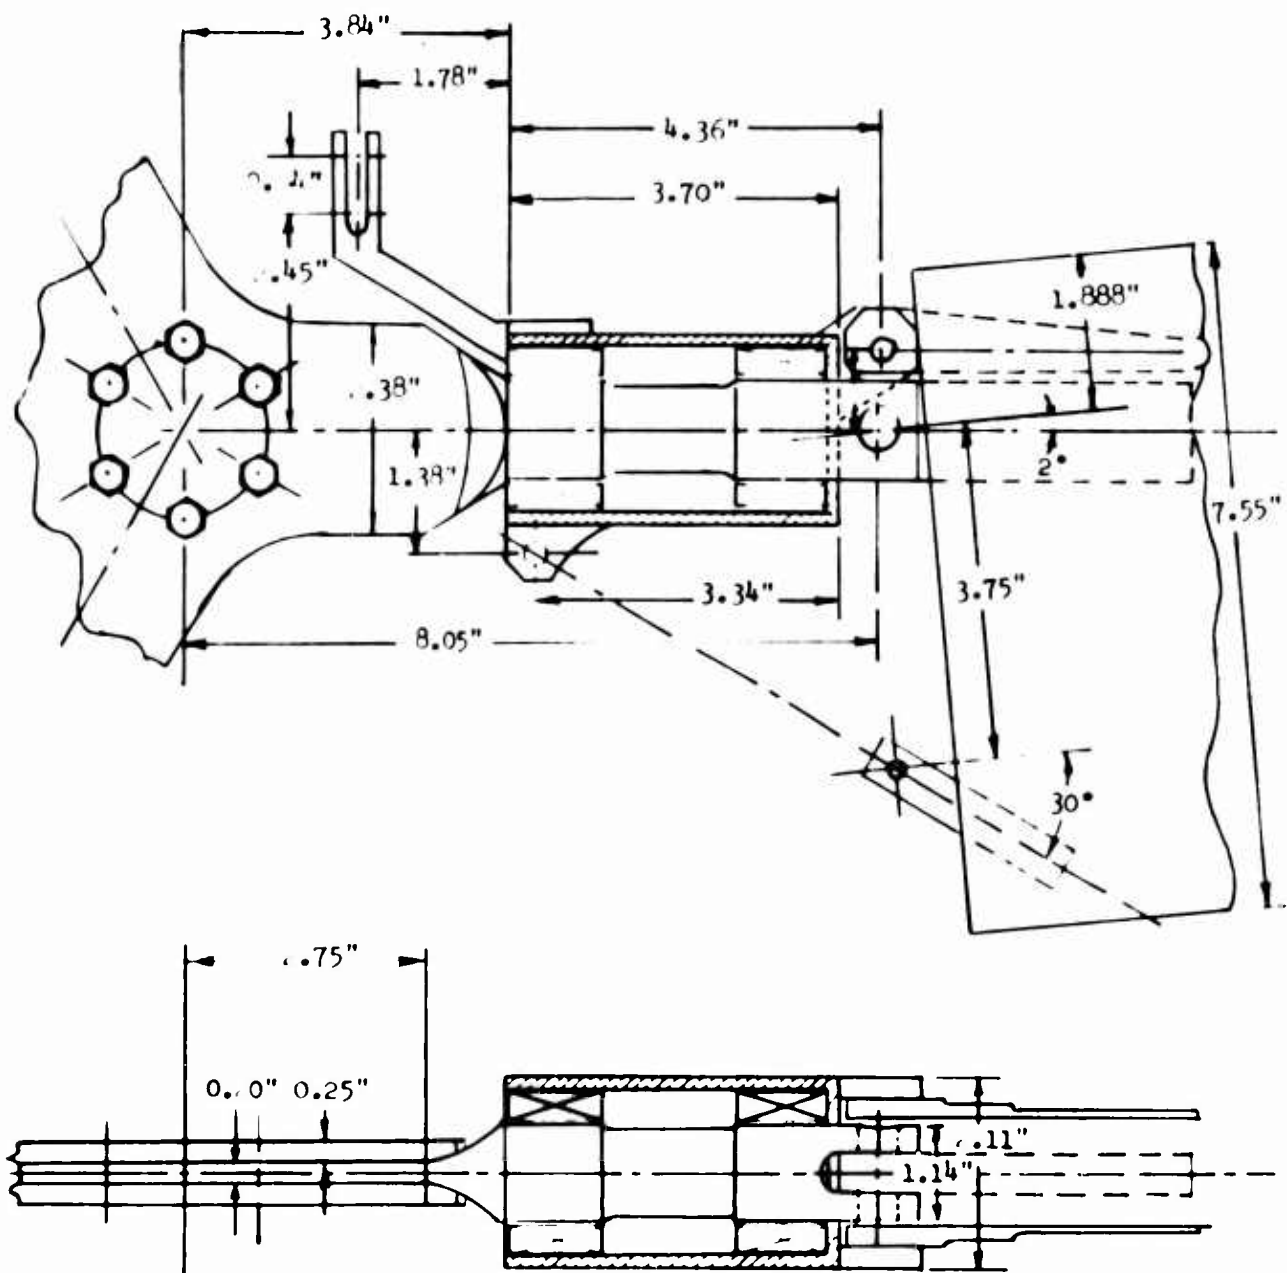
GEOMETRY OF THE HUB-SPINDLE ASSEMBLY
